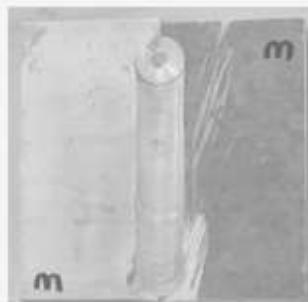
Welded plate using the rotational speed of 1250 rpm
